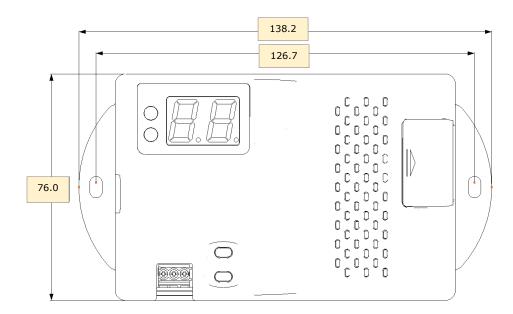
LDSBus Trailing Edge Light Dimmer Dimension - Top View
